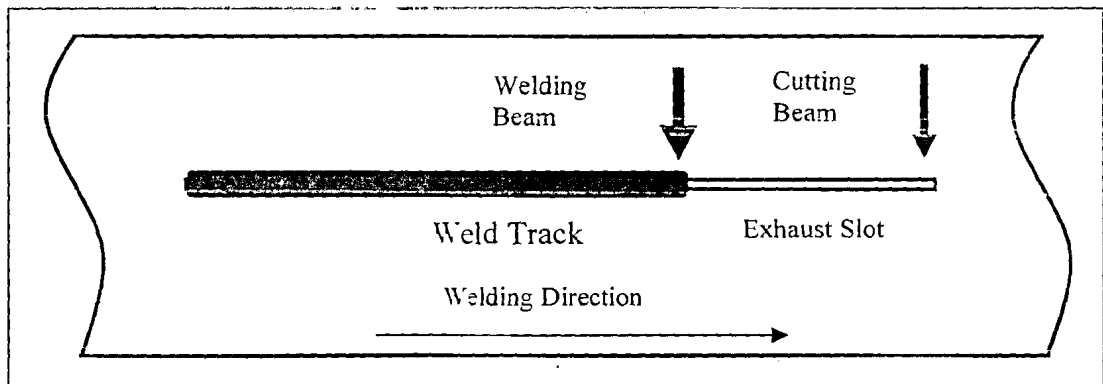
Top view of the laser lap welding using the forward slot (through both sheets)
